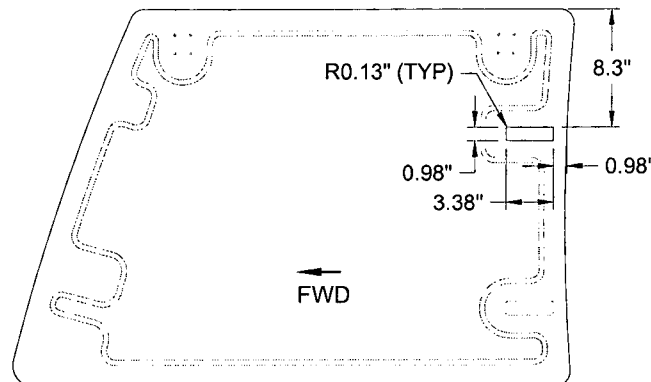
(b). D3186-2 SPACEPOD DOOR LATCH CUTOUT
